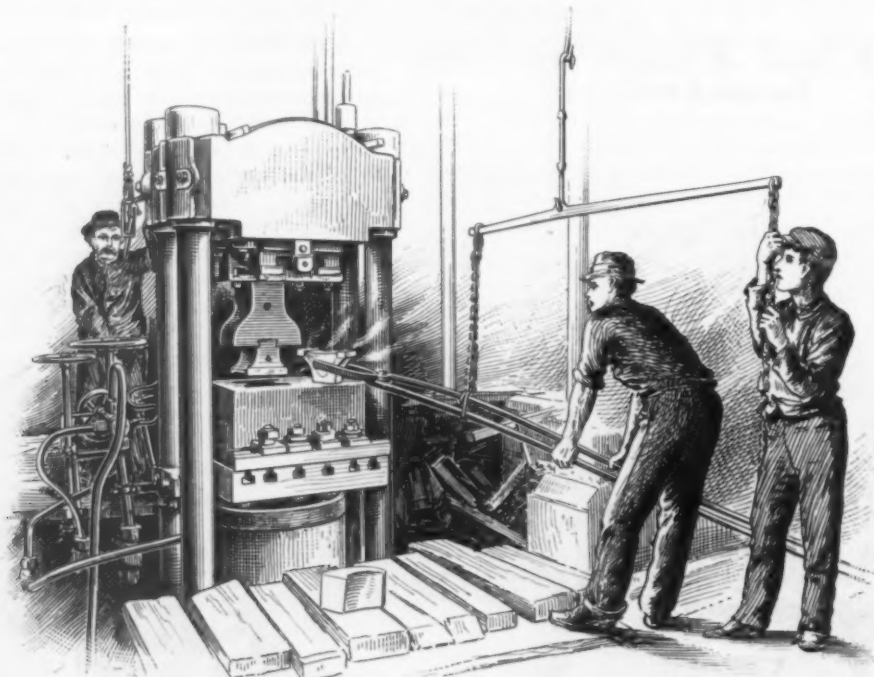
Forming Bottom of Anvil in Hydraulic Press.
